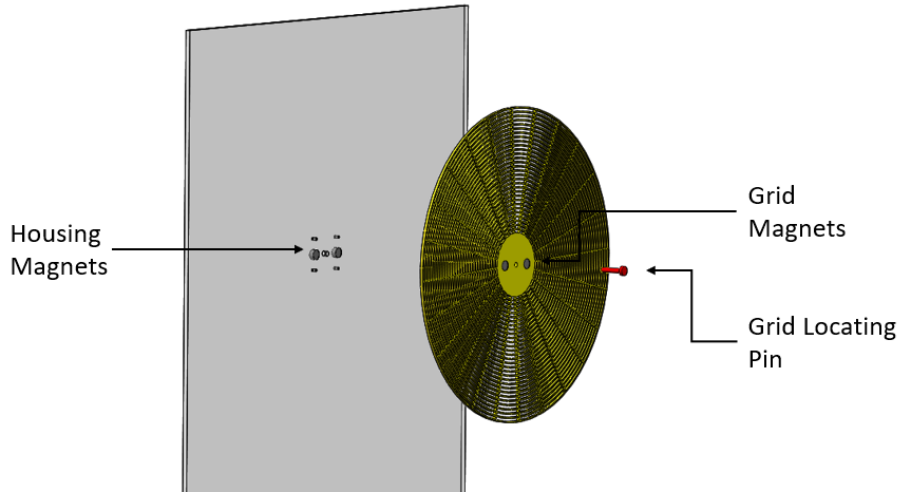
Grid attachment onto rear housing with embedded magnets and locating pin.
